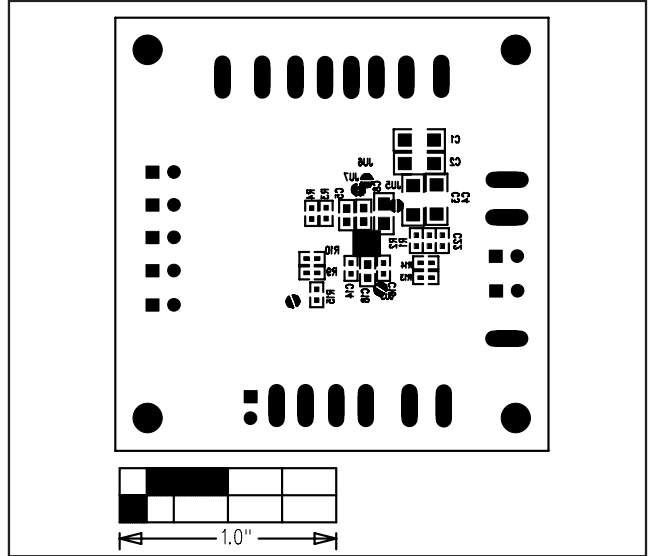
MAX8680 EV Kit Component Placement—Bottom Layer
